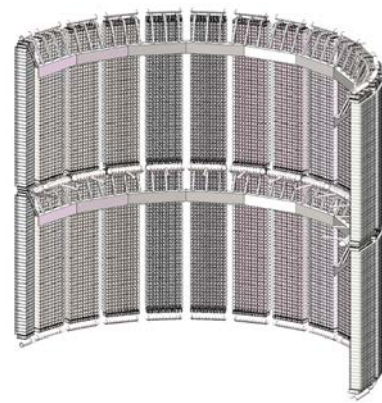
Cutaway view of full receiver assembly with multiple panels around aperture.
